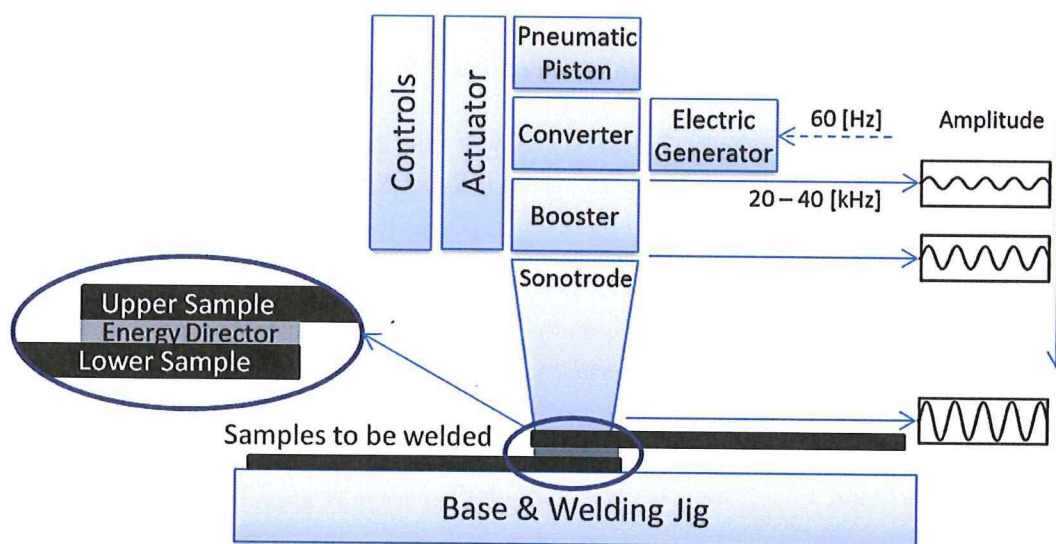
| Schematic view of an ultrasonic welding machine showing amplification steps [6], [20]
